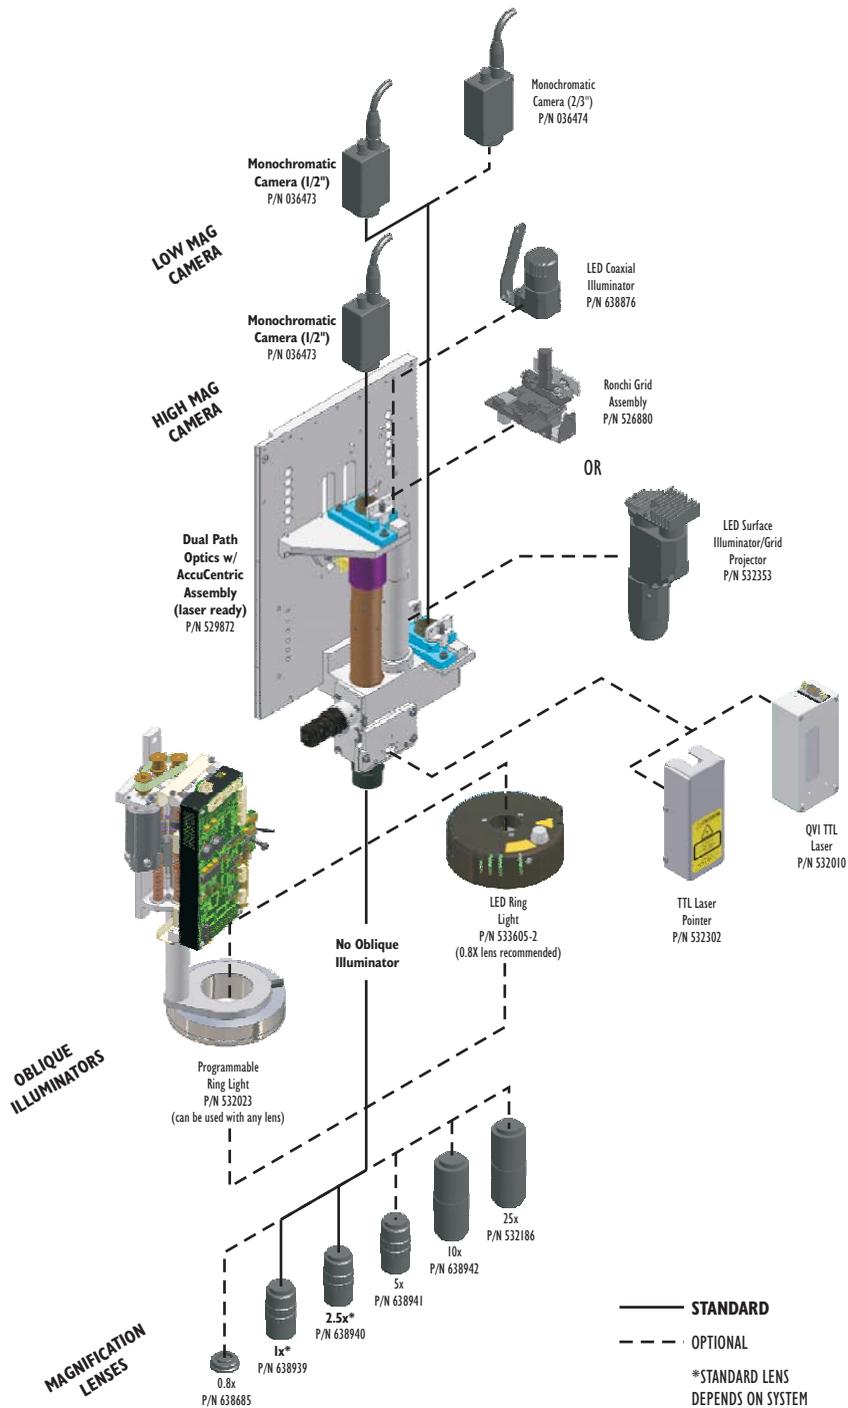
Laser Ready Systems Equipped with AccuCentric Assembly
